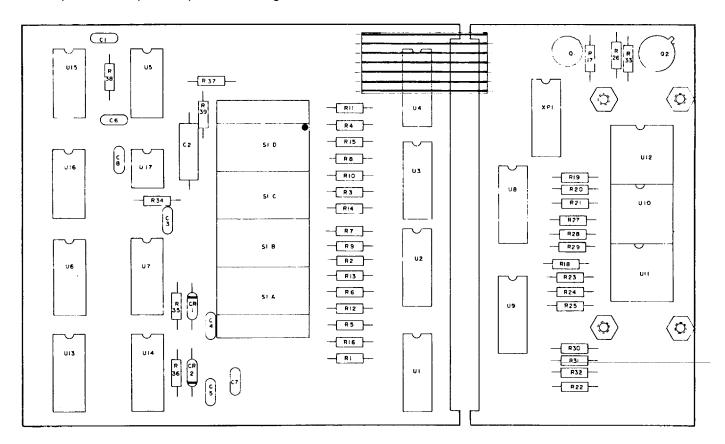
Reference Delay/Readout Circuit Card Assembly, 1A3A1 Parts Location Diagram
